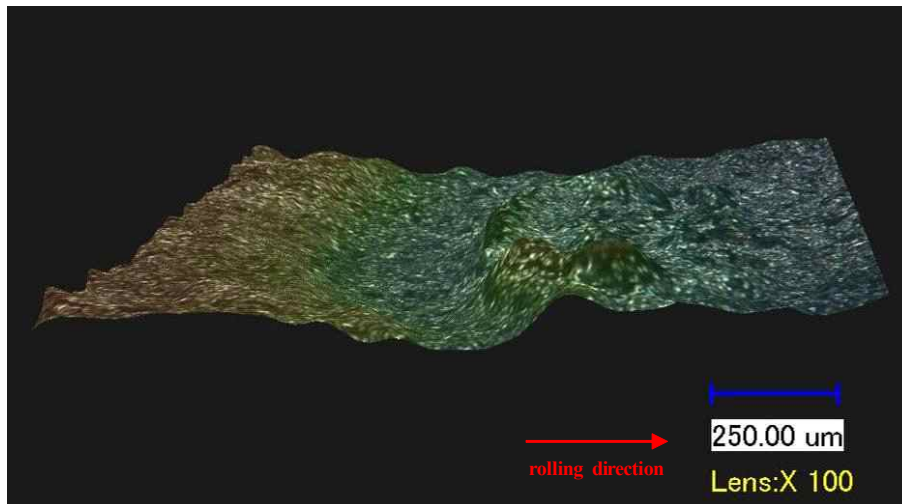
Three dimensional surface morphology of substrate after zinc coating been removed.
